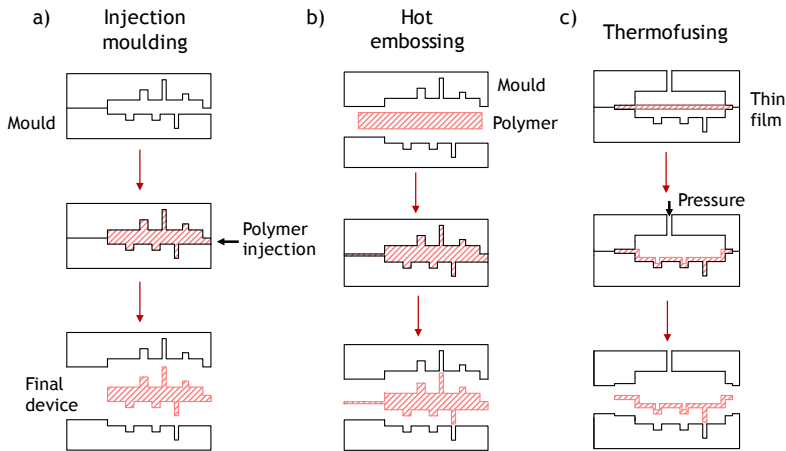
Representations of the a) moulding injection, b) hot embossing and c) thermofusing processes [34].
